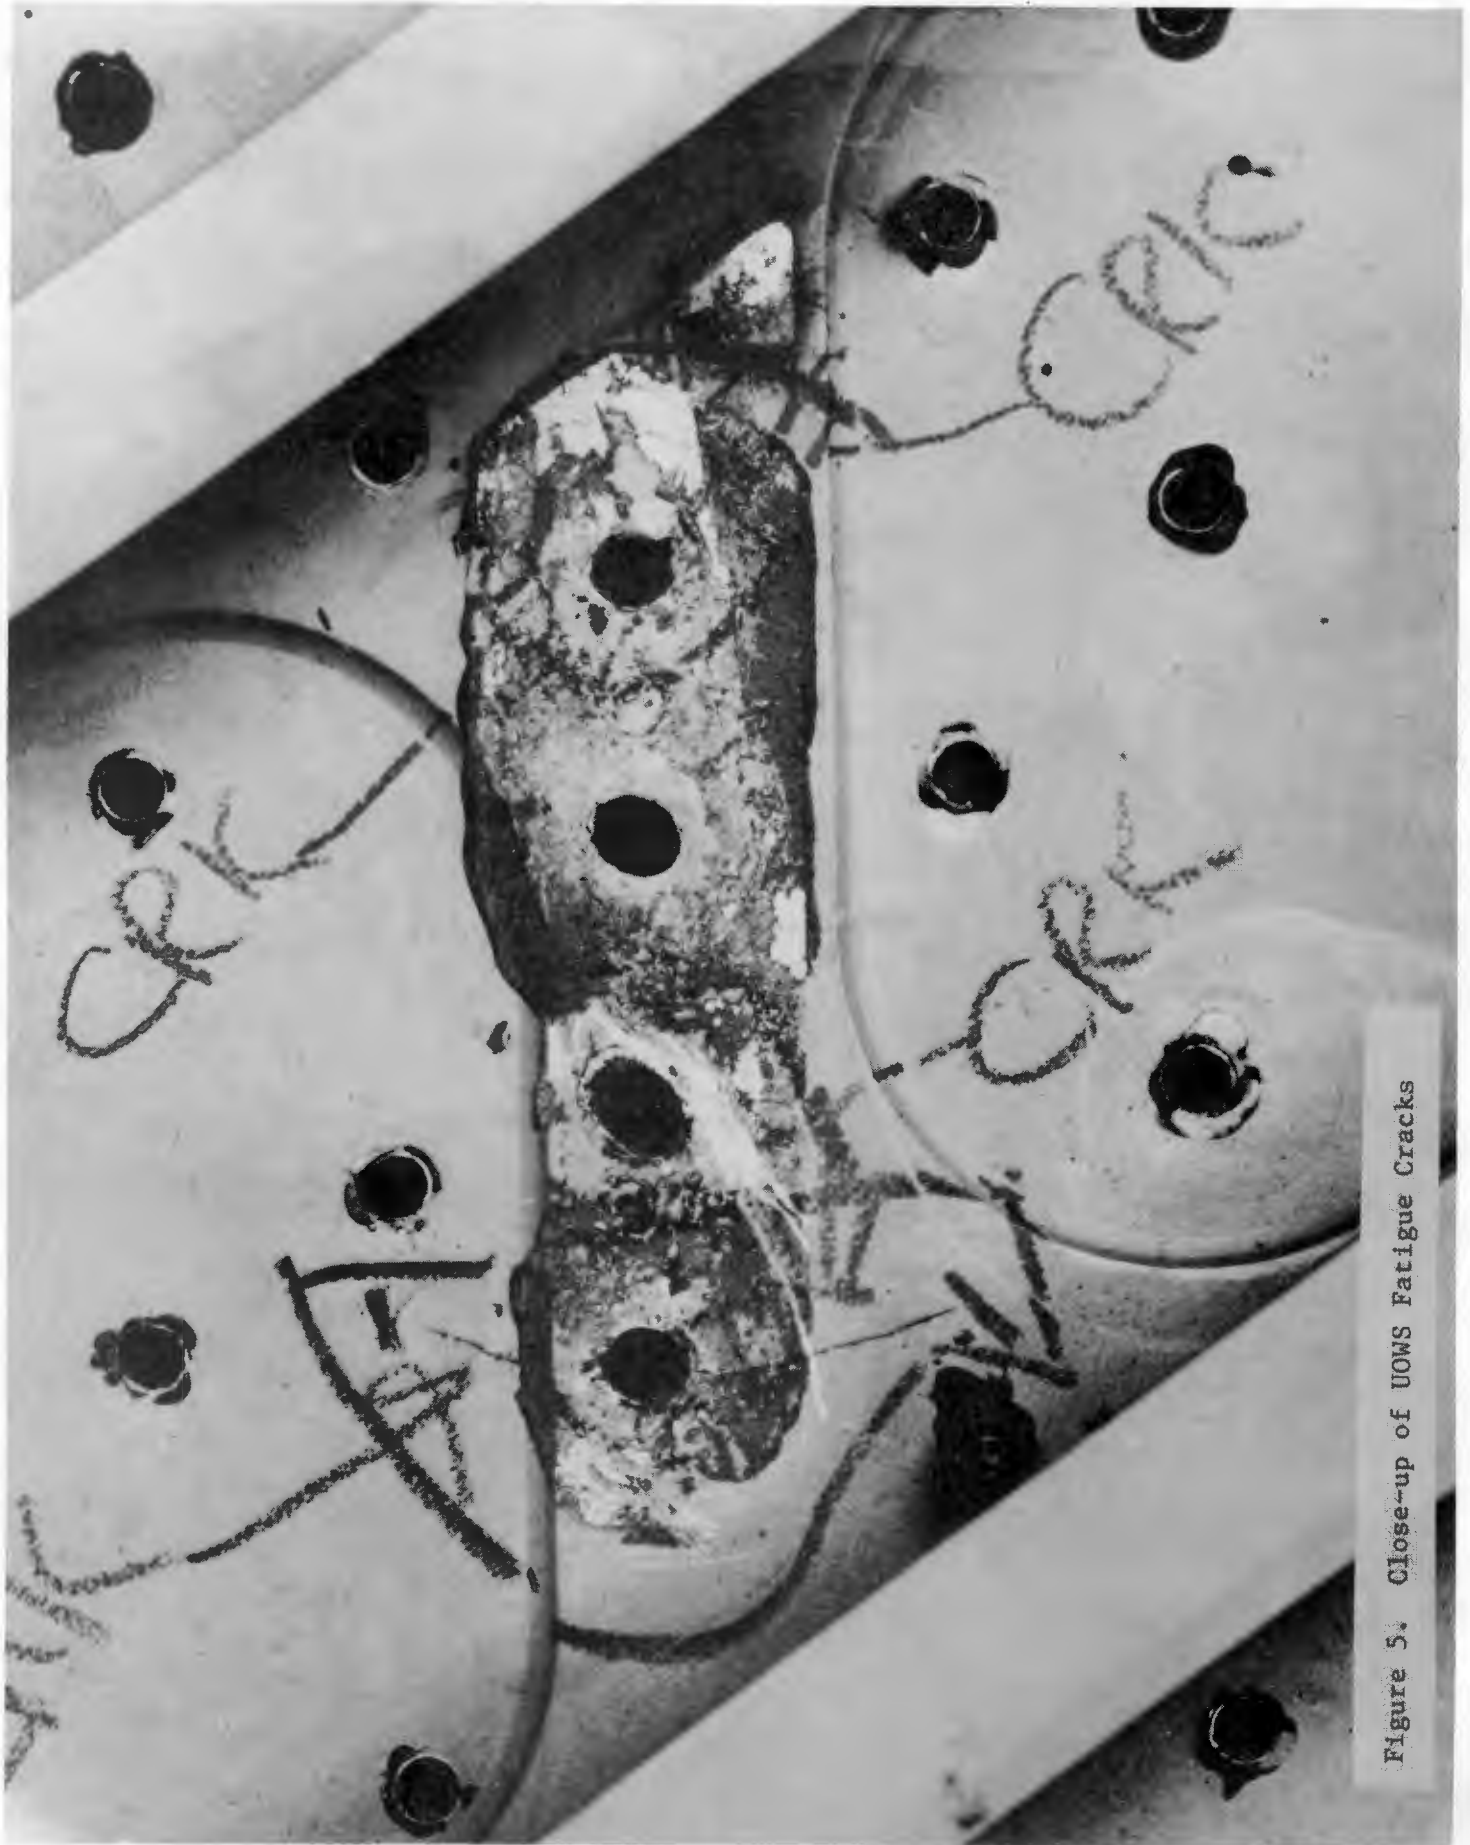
Close-up of UOWS Fatigue Cracks
